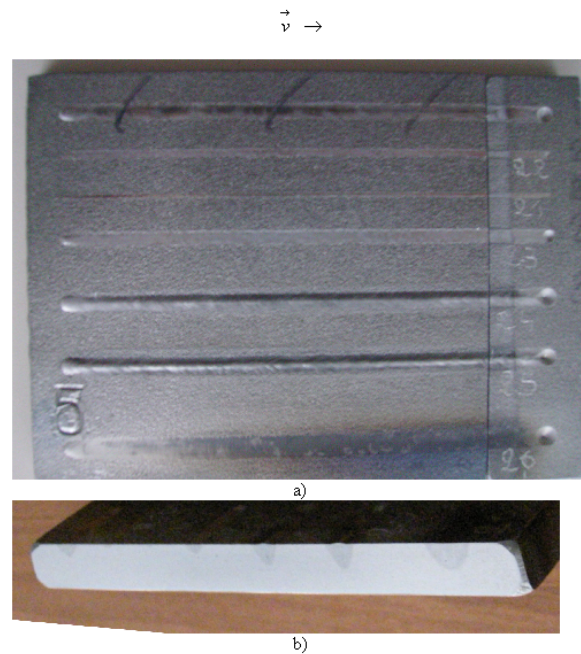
Photograph of the plate 5) Top view b) view section view, from left to right the welds: 22,21,23,24,25,26
